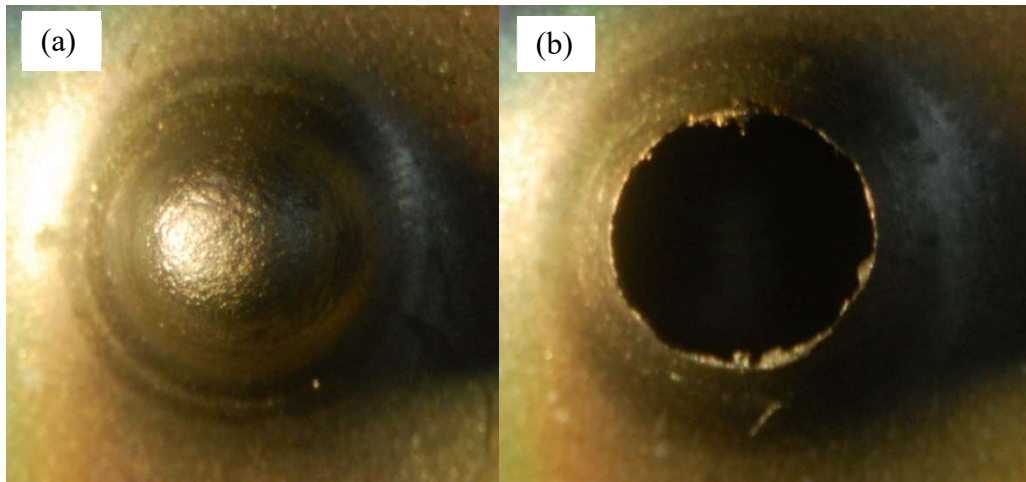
Post-test In718, 2.77 mm backed test specimens at punch displacements of (a) 4.49 mm-no fracture and (b) 5.20 mm - fracture
